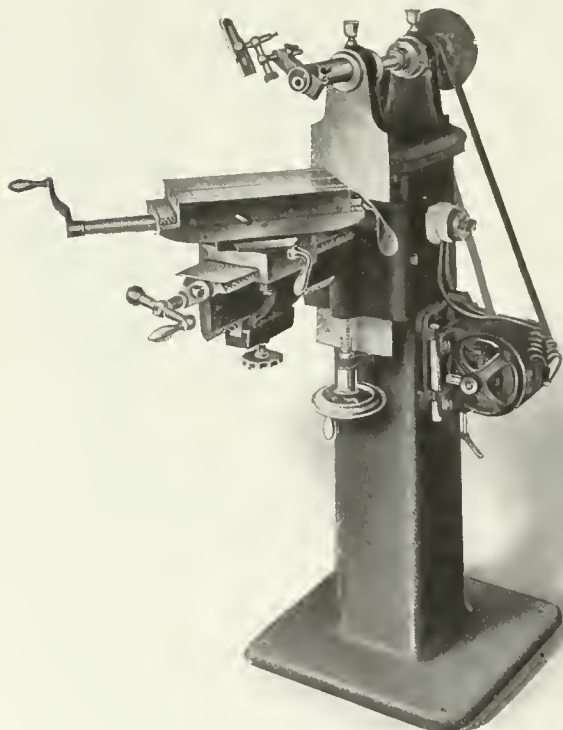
Garvin No. 3 Motor-driven Universal Cutter and Surface Grinding Machine
